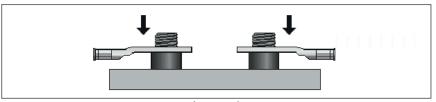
HV BM 1.2+S, power cable HV- (≤35 mm²), placing the ring terminals on the threaded bolts
